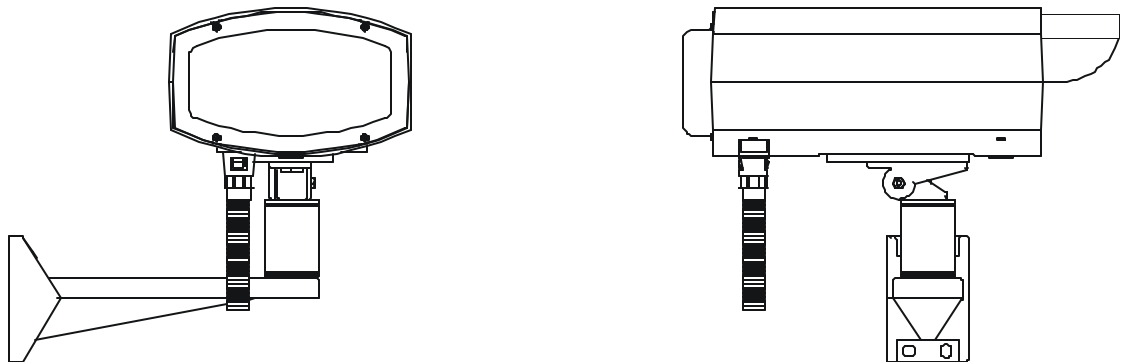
Indoor FlightLite Wall-Mount Arm
